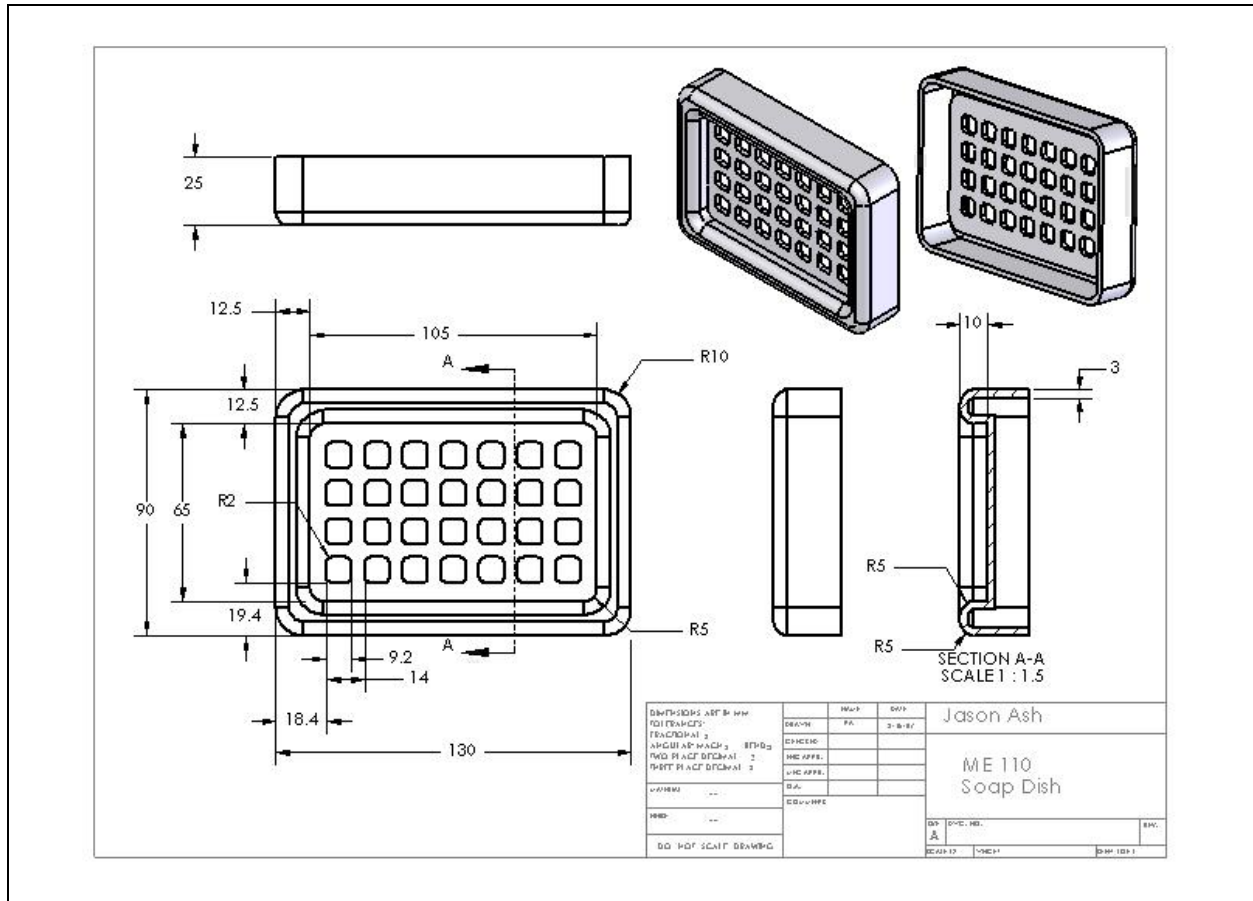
Final drawing to be submitted of soap dish using fillets and linear pattern (dimensioning required)
